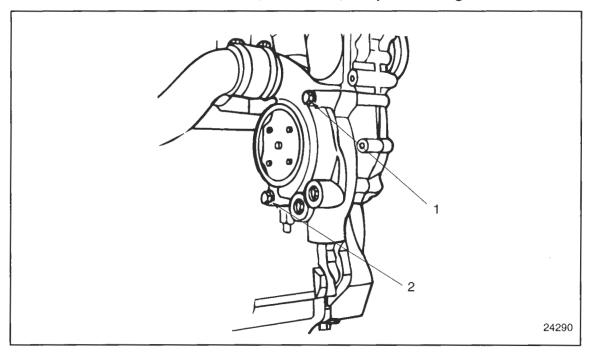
Gear Case Cover Bolt Torque Sequence (Right Rear)
